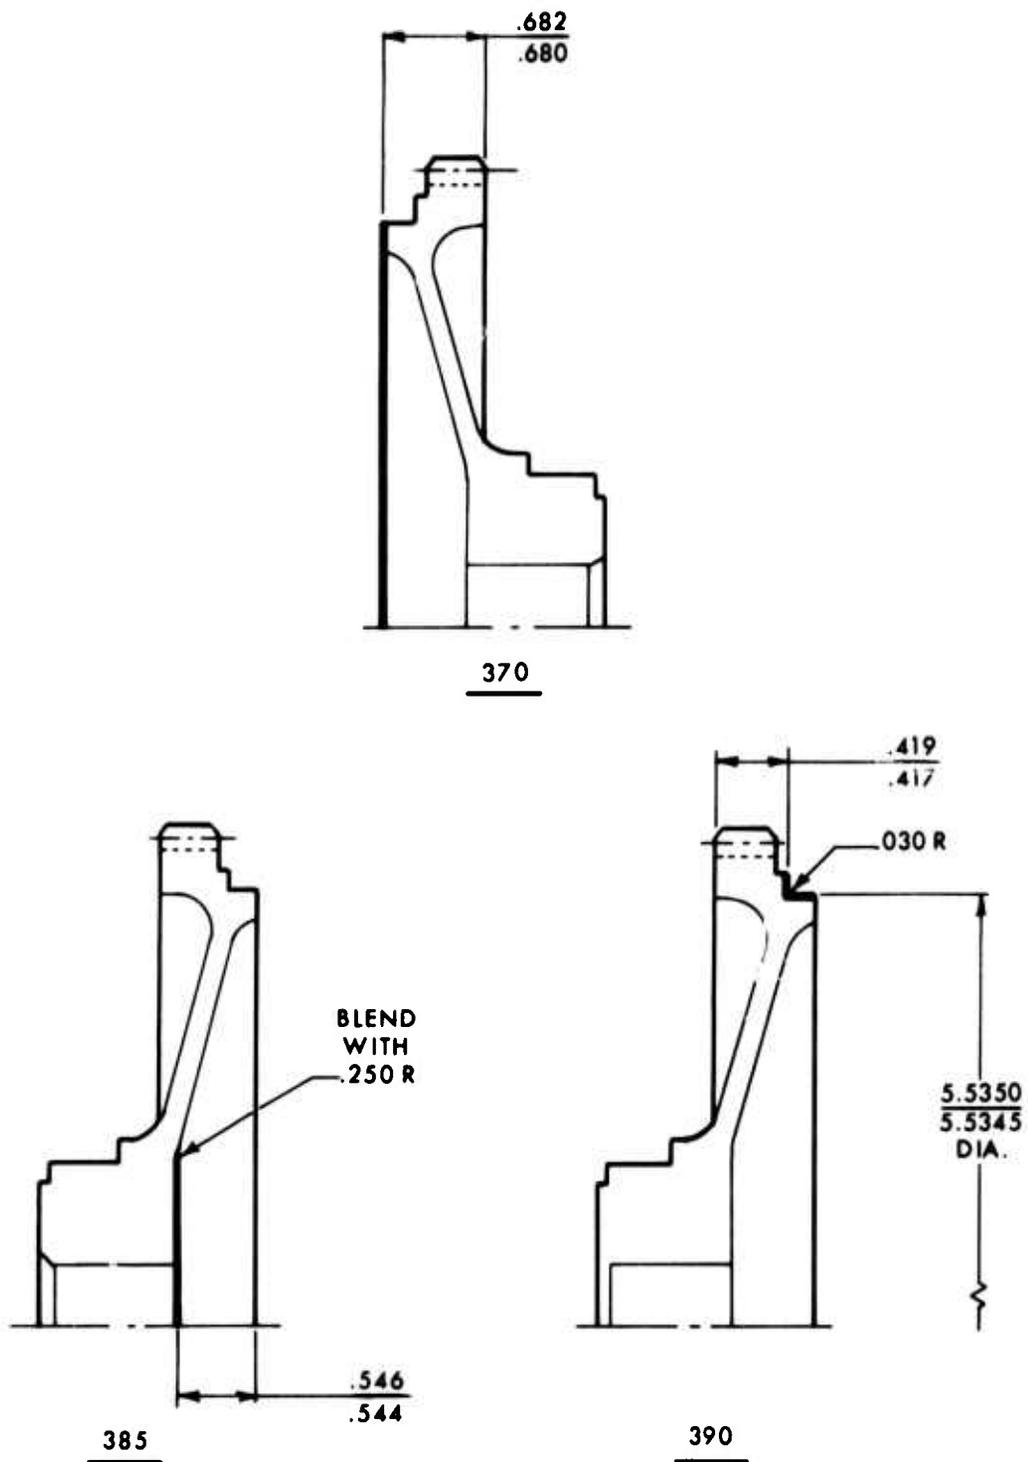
RG351-11182-106, Machine Operation Drawing. (Sheet 4 of 4).
